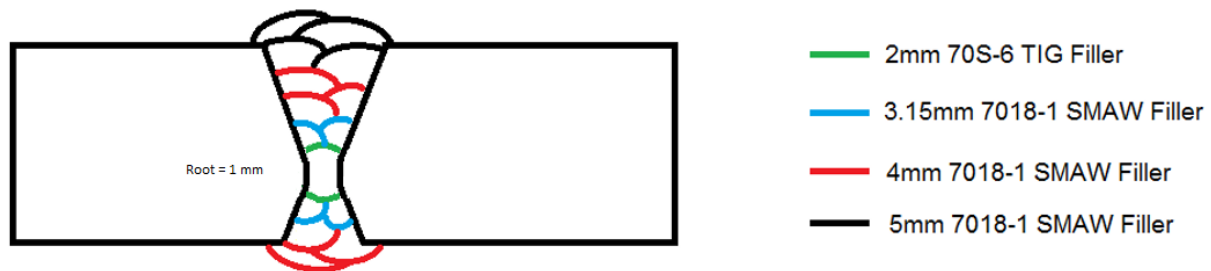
Schematic illustration of a full thickness welding sequence based on WPS 1-1-D-21-1 Rev 2a
